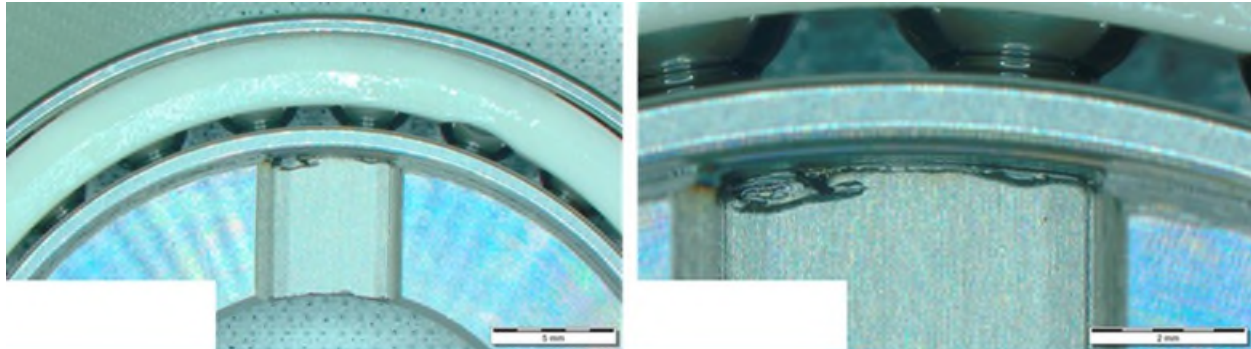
Burrs on the intersection of wave generator plug and inner ring of bearing.
